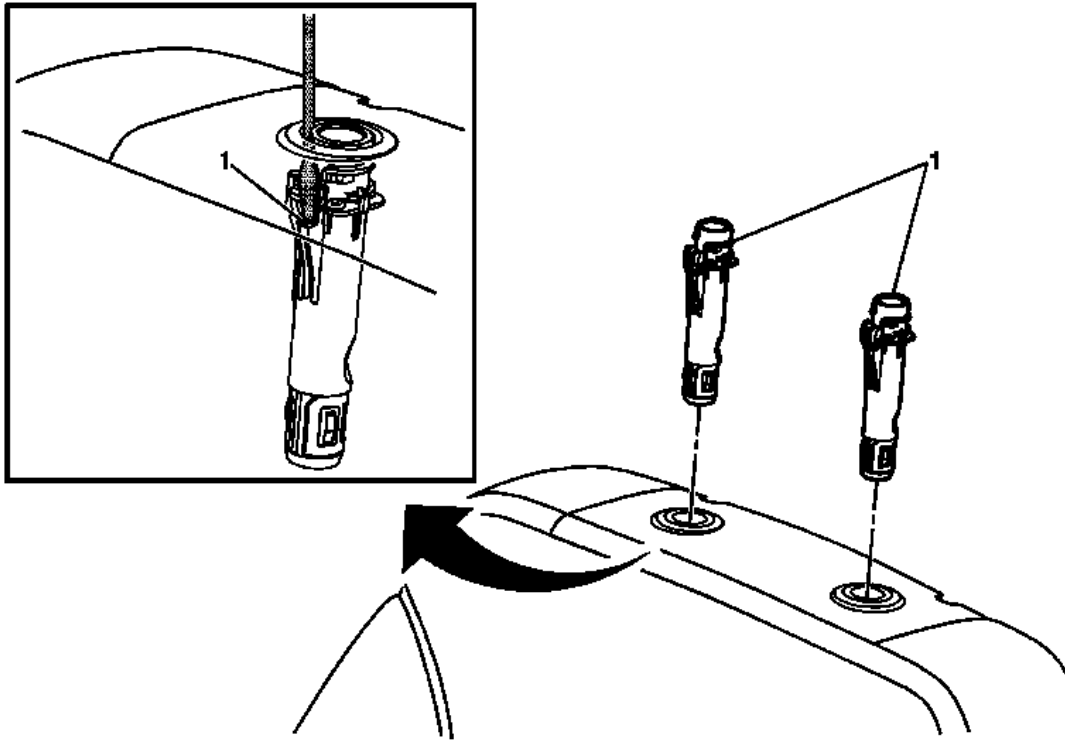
Identifying Front Seat Head Restraint Adjust Rod Guides
